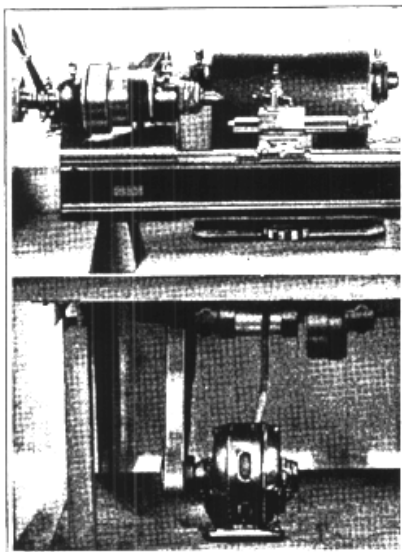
Rivett Series 505 lathe on bench with Horizontal Safety Drive Countershaft and Jackshaft
